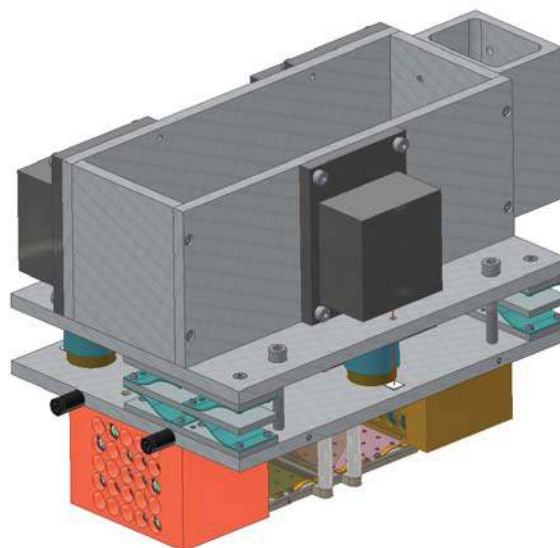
CAD 3D representation of the inspection system, above: drive unit, below: optical unit
